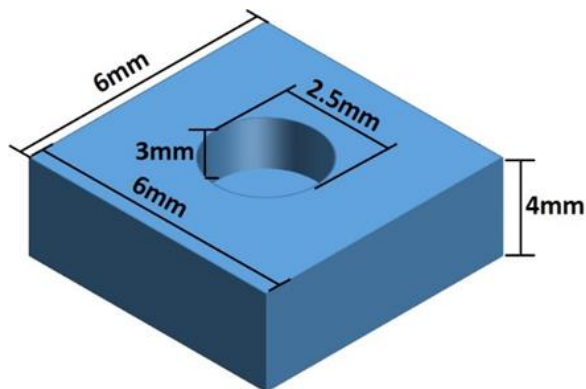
Reservoir device when it is removed from the 3D printed mold.
